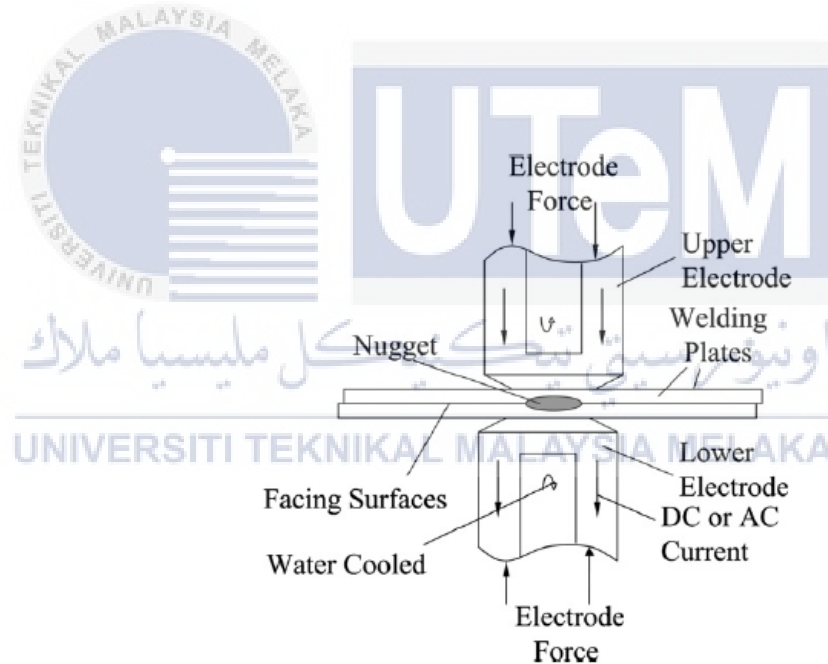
Spot welding system (Zhao et al., 2013)
